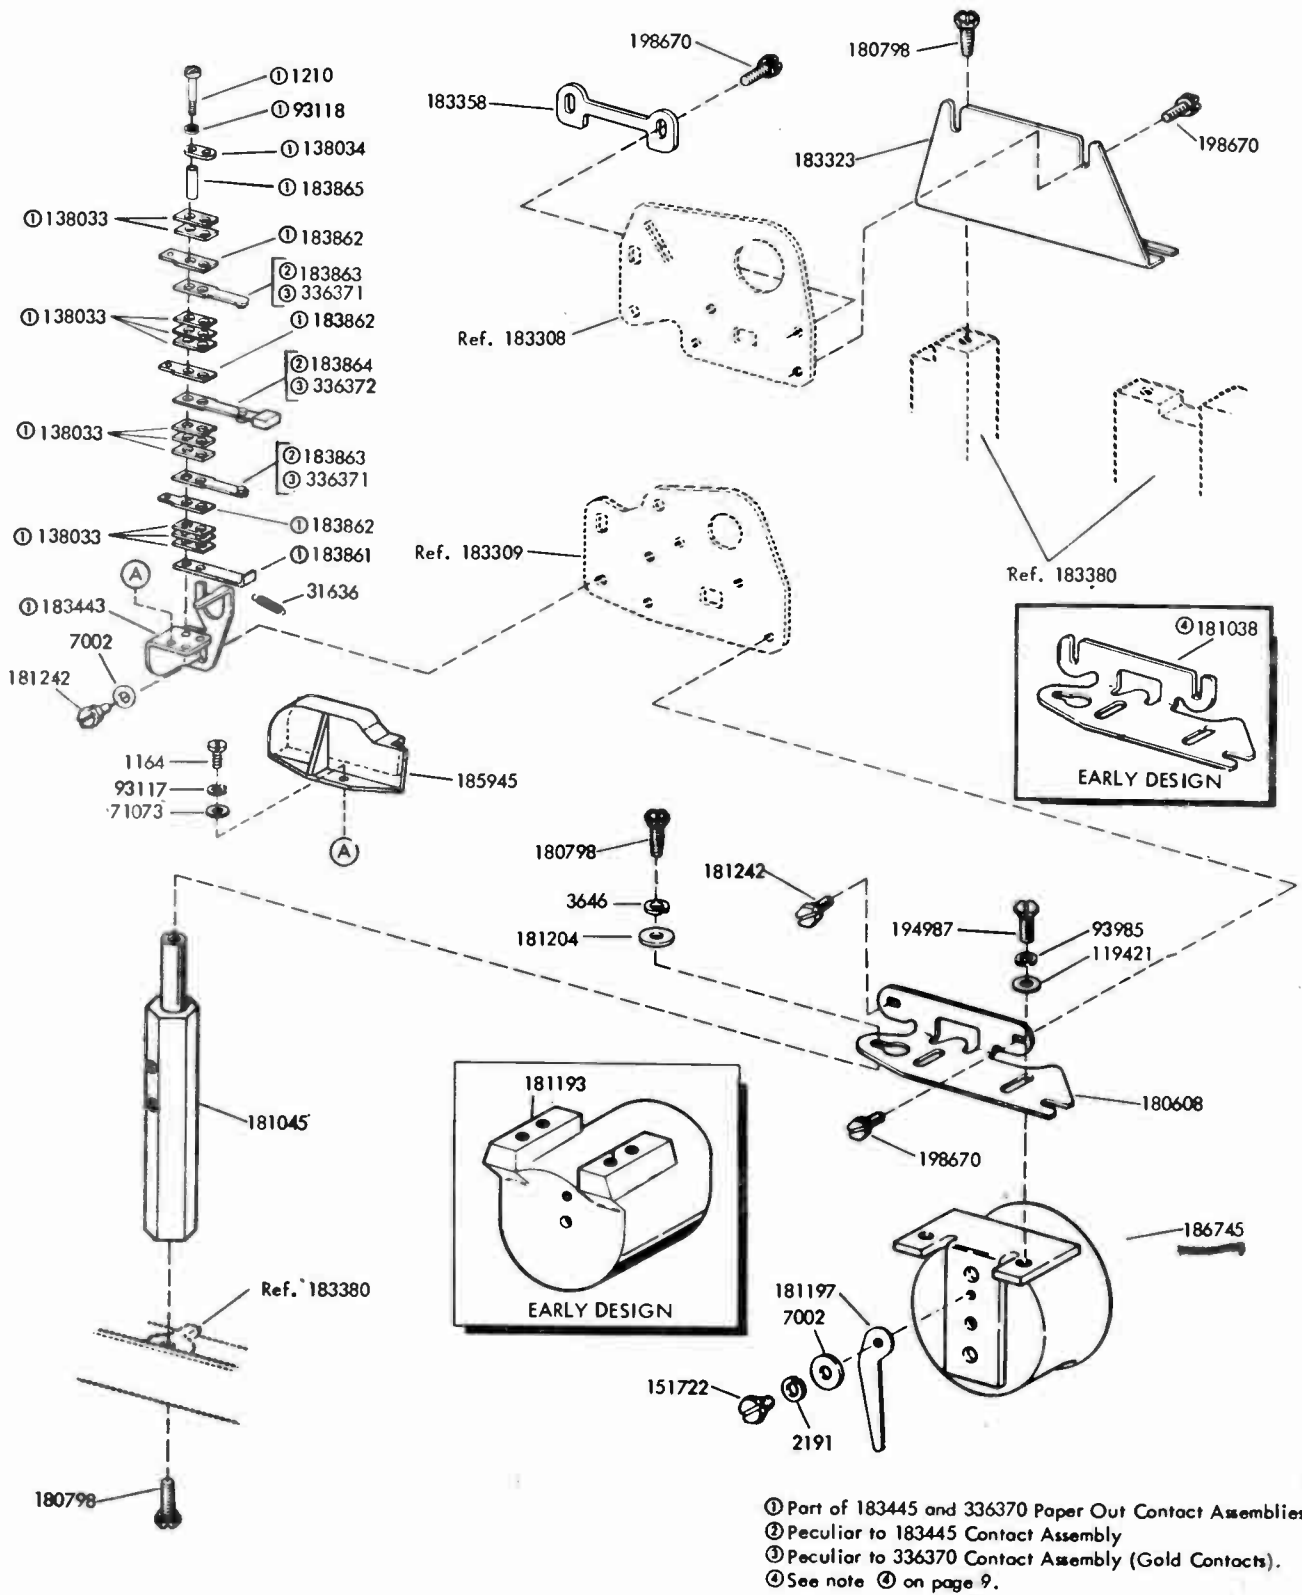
PLATEN MECHANISM - SPROCKET FEED (Continued)
